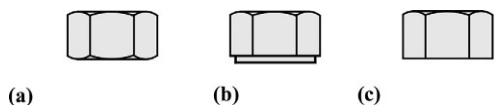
Shapes of nut-bearing surfaces. (A) Double chamfered, (B) raised-face, and (C) single-chamfered.
